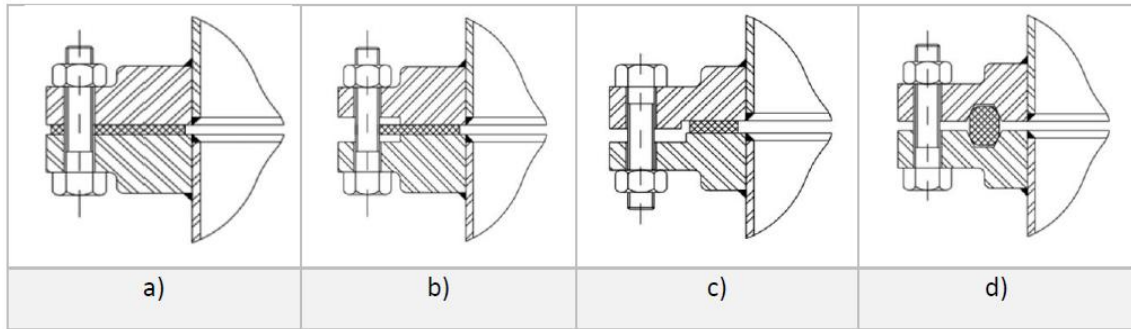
Type of flange faces [Asm´11]: a) Flat face (FF) b) Raised face (RF)
